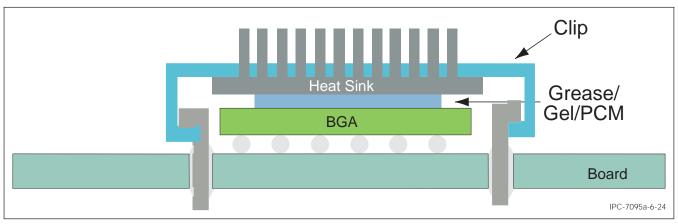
Heat Sink Attached to a BGA with a Clip that Hooks onto a Stake Soldered in the Printed Circuit Board
